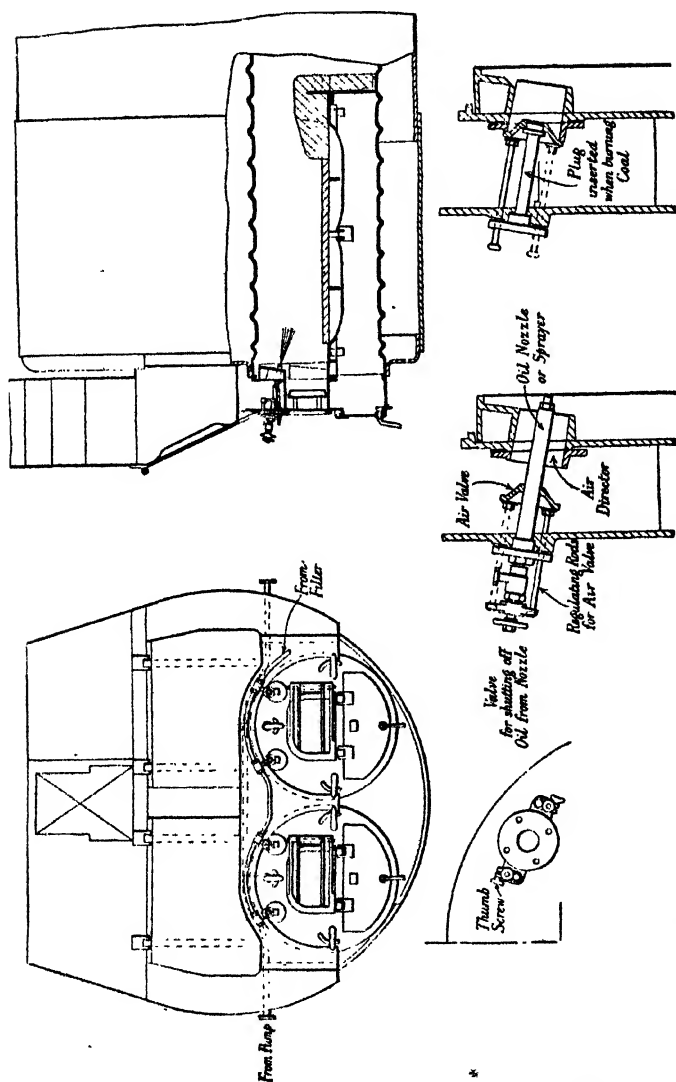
Arrangement of combined oil- and coal-fuel installation with Howden's system of forced draught and Korting pressure oil-jet burners.
